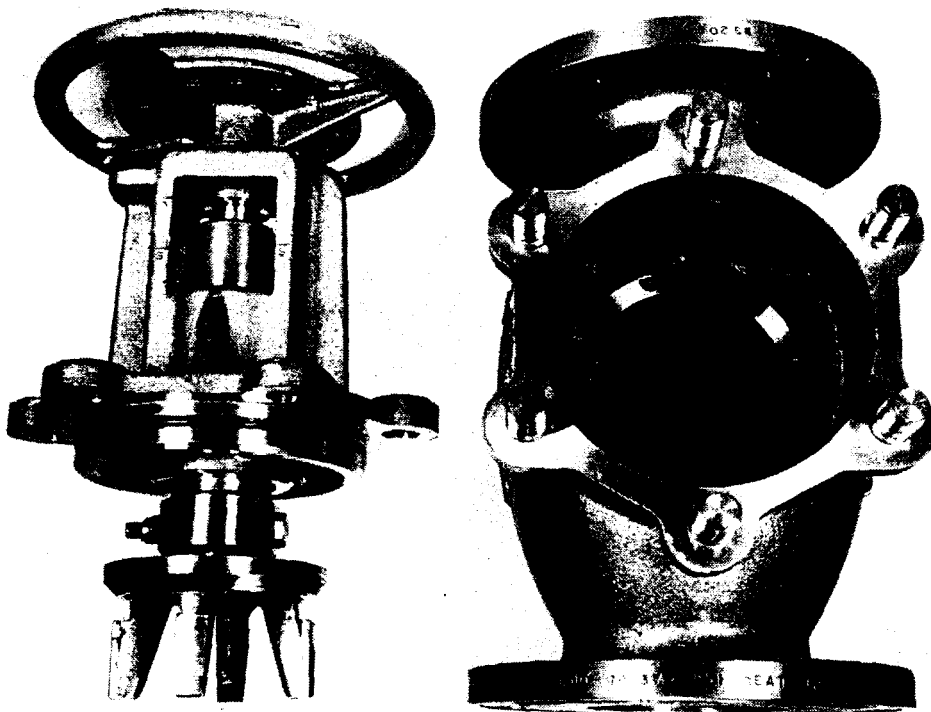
INTERNAL CONSTRUCTION OF A 3½ IN. R.A.N. VALVE SHOWING THE MONEL SEAT AND MONEL-FACED VALVE DISC. THE VALVE DISC AND SECURING BOLT ARE MOUNTED IN SYNTHETIC RUBBER
